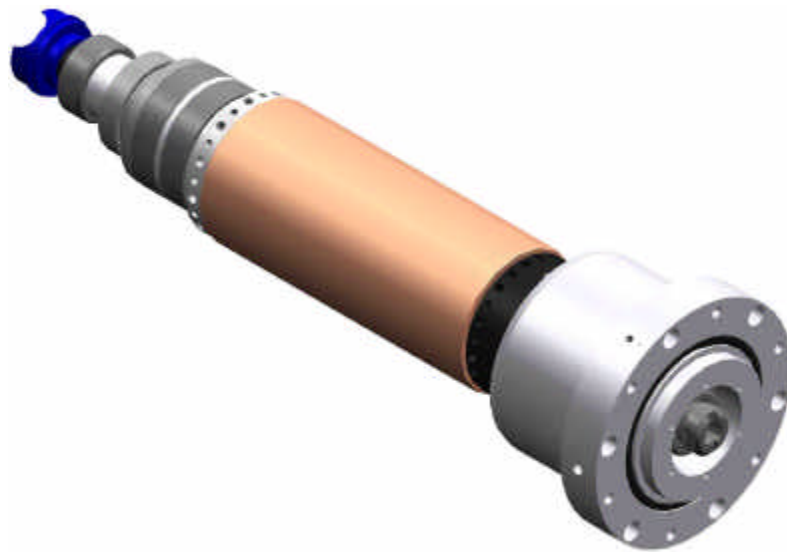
ES919 HSK F63 Short Nose spindle shaft kit
